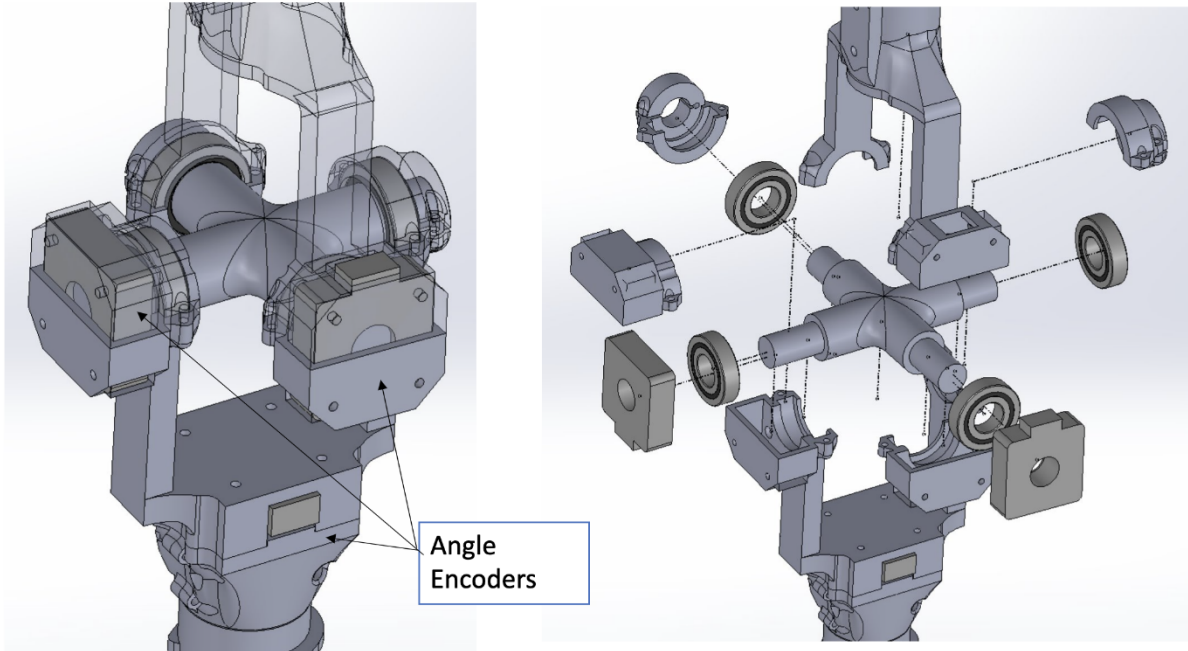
Assembled view of the universal joint (left), exploded view of the universal joint (right)
